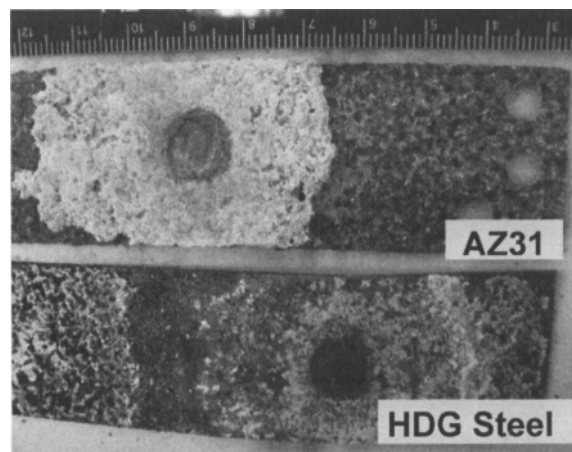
Appearance of the matching (inner) surfaces of AZ31 and HDG steel specimens after 18 cycles of corrosion test.
